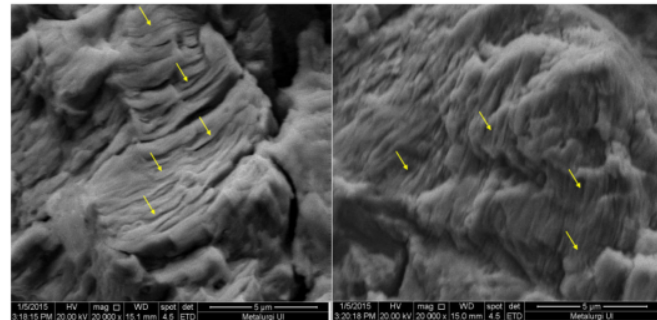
Striation on the specimen Fracture surface on specimen with SD 2.5 mm; at the hole zone (a), at hole edge (b)
